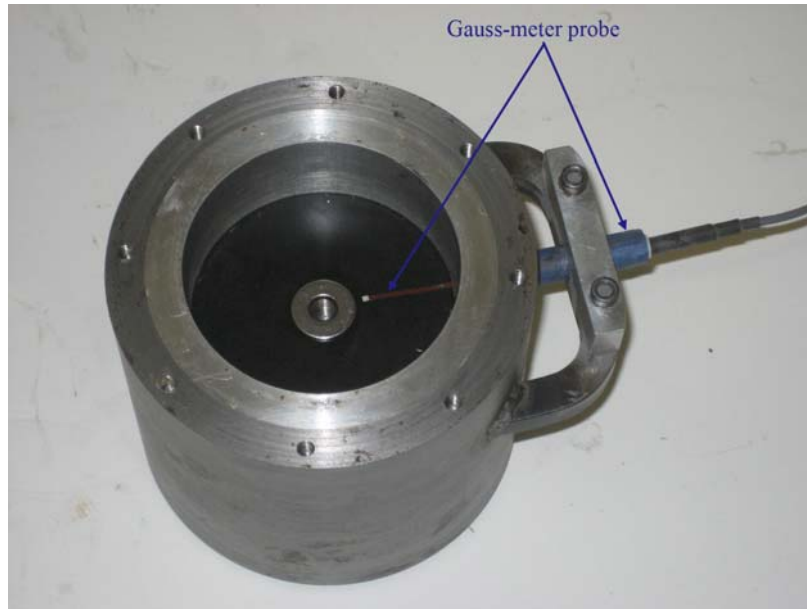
The Gauss-meter probe mount welded in place with adequate alignment (photo by Ryan Cavey)
